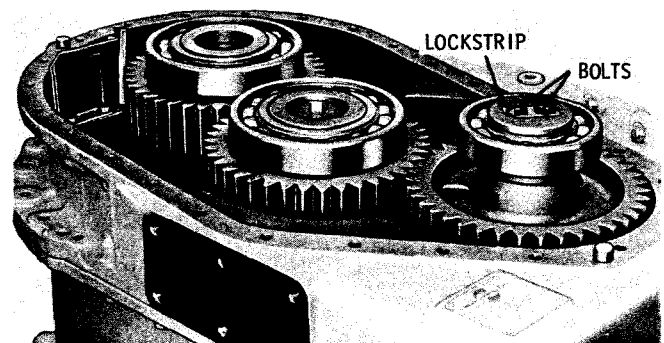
Transfer driven gear rear bearing retaining parts
